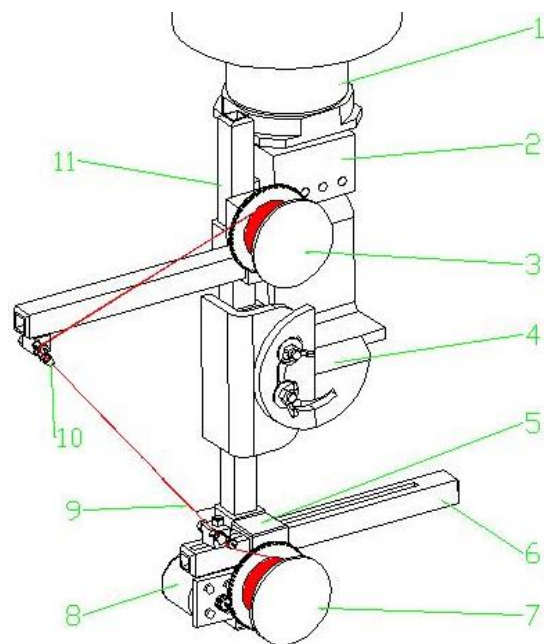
Constructive version of the device for machining with wire tool electrode adaptable on a ram EDM machine Sodick AD3L
